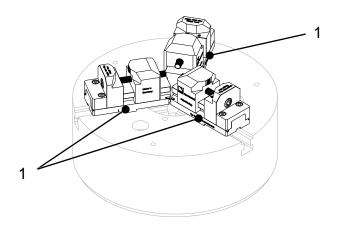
Fitting the InoTop® hybrid clamping jaws
